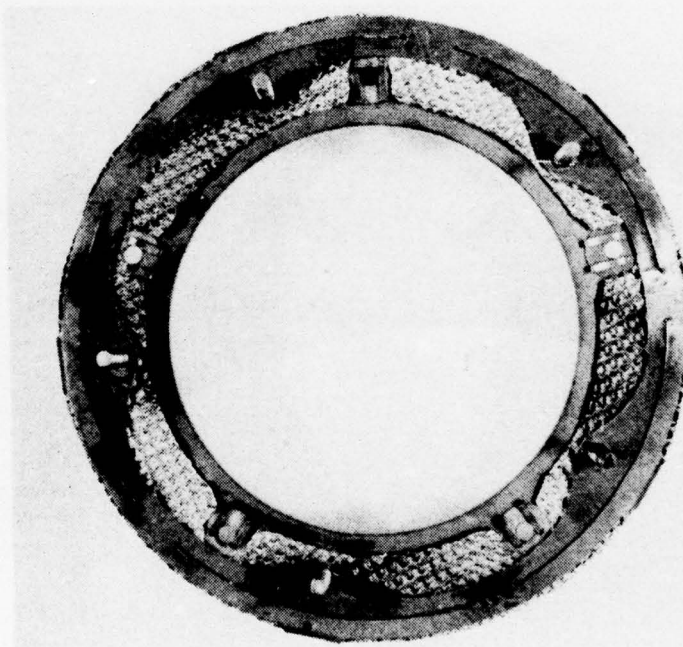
RCSIC Forward Shroud After 50 Hour Engine Test With Spring Retainer Can, Heat Shield and Bolt Seals in Place
